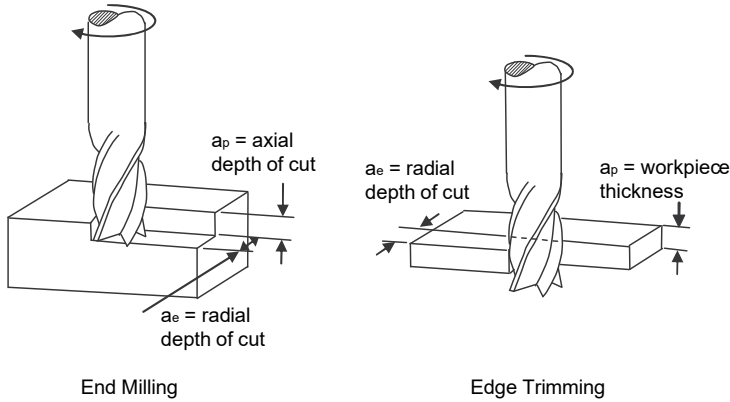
Comparison of the engagement conditions of end milling and edge trimming [31].
